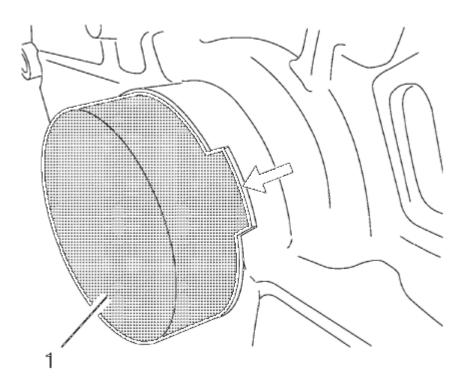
View Of Engine Front Cover & Gasket Courtesy of GENERAL MOTORS COMPANY
